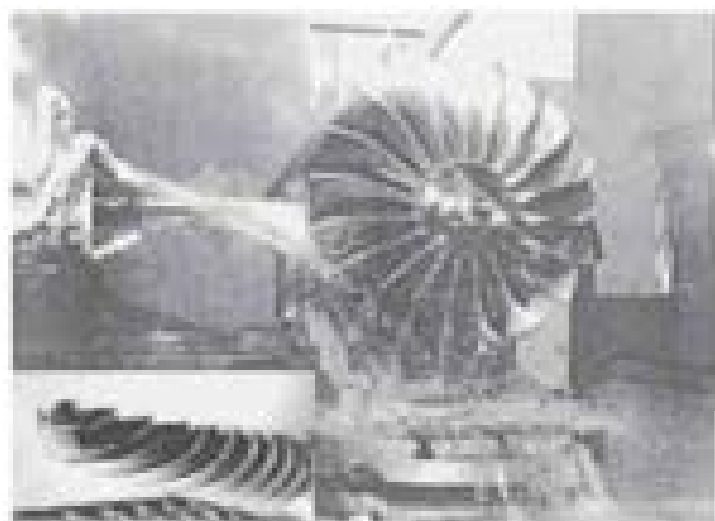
Machining of the compressor and the cutting tool used in example 2
